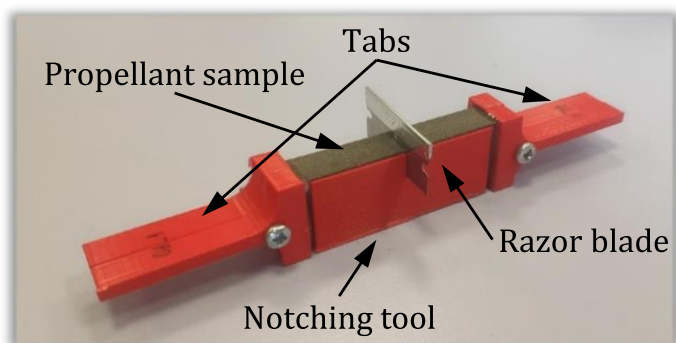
Fracture samples' notching set-up. Fracture sample stuck to the tabs, inserted in the designed sliding tool.
